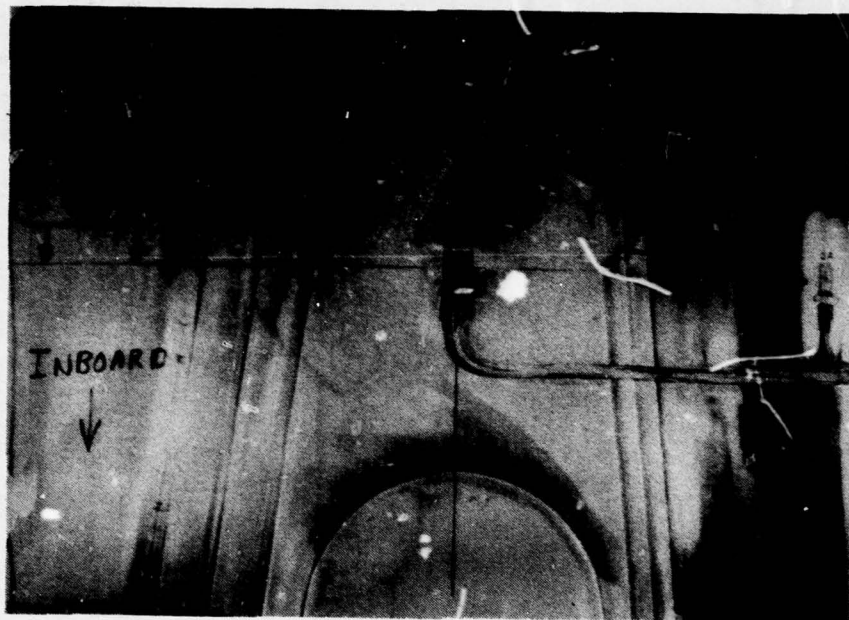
Photograph showing location of failure in inboard blade section No. 3. Crack location outlined by black rectangle.
